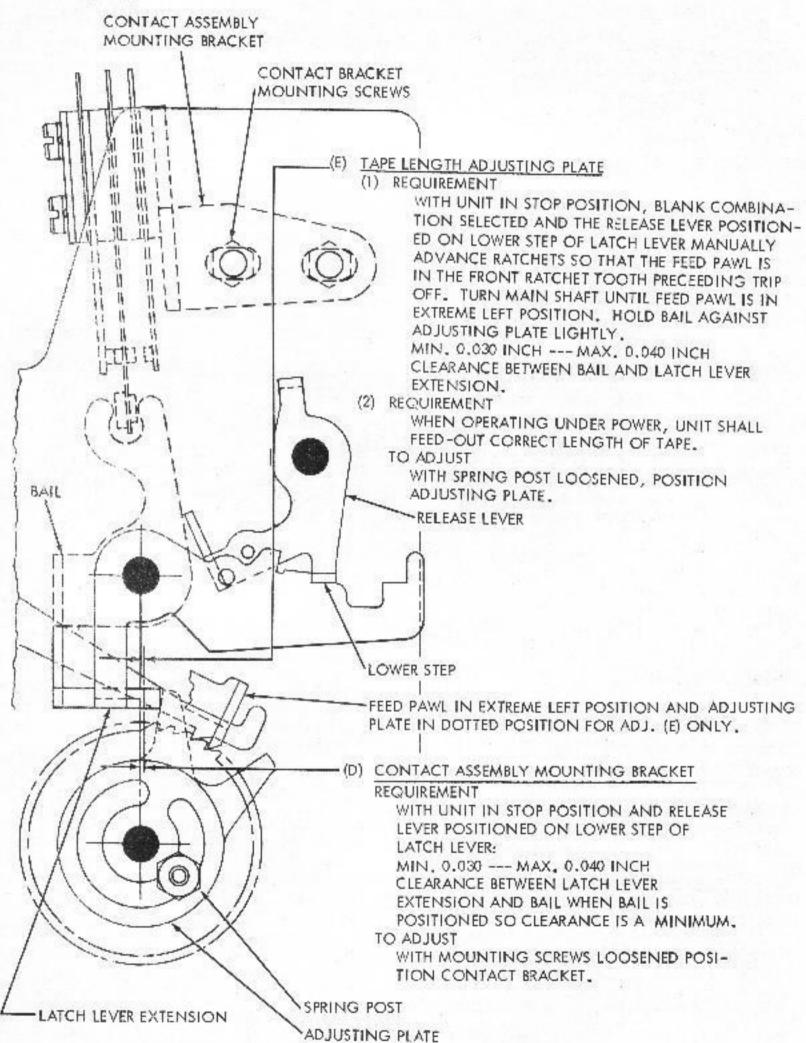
END OF FEED-OUT TIMING CONTACT FOR NON-INTERFERING LETTERS AND BLANK FEED-OUT MECHANISMS
